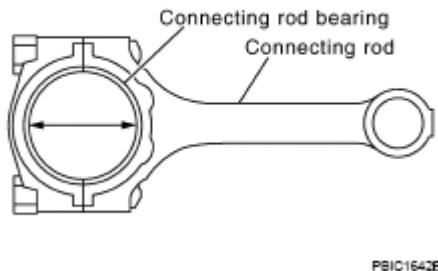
Identifying Connecting Rod Bearing Oil Clearance
